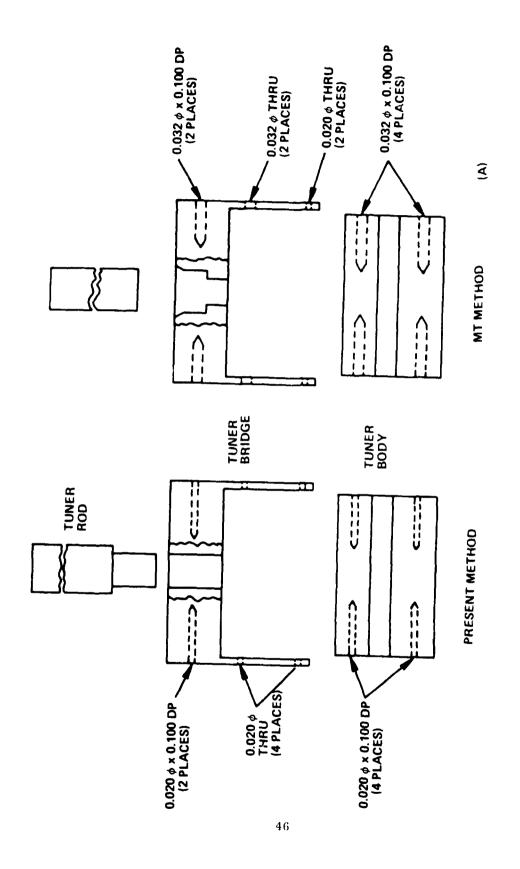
TUNER ROD BRIDGE ASSEMBLY
